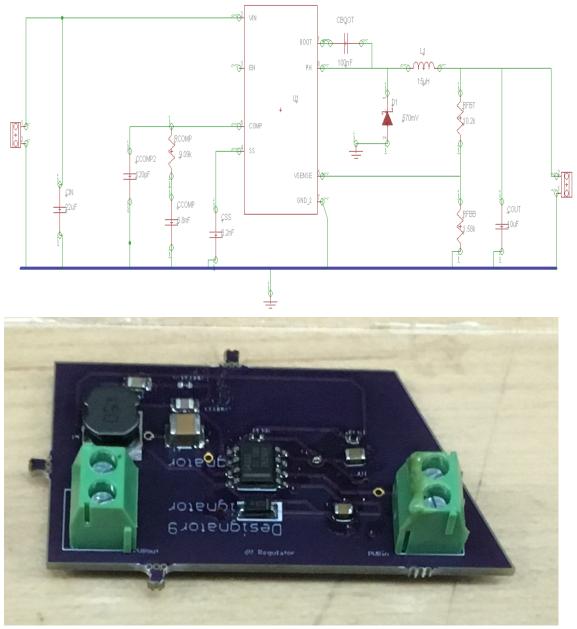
The Second Power Supply Unit Schematic along with its final PCB board
